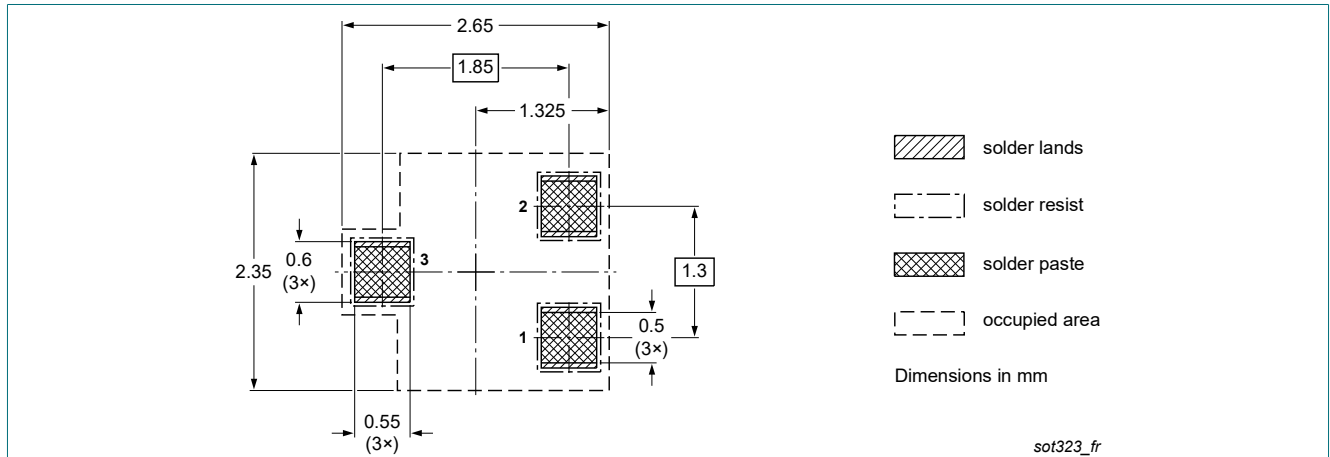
Reflow soldering footprint for SC-70 (SOT323)
